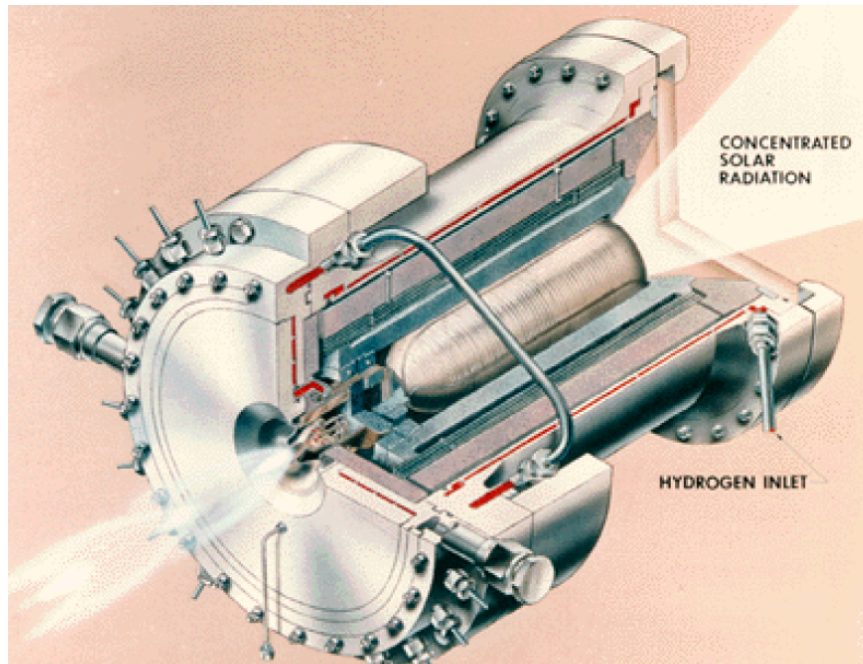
Cutaway drawing for the Rocketdyne solar thermal assembly. Originally printed in Shoji [9].
